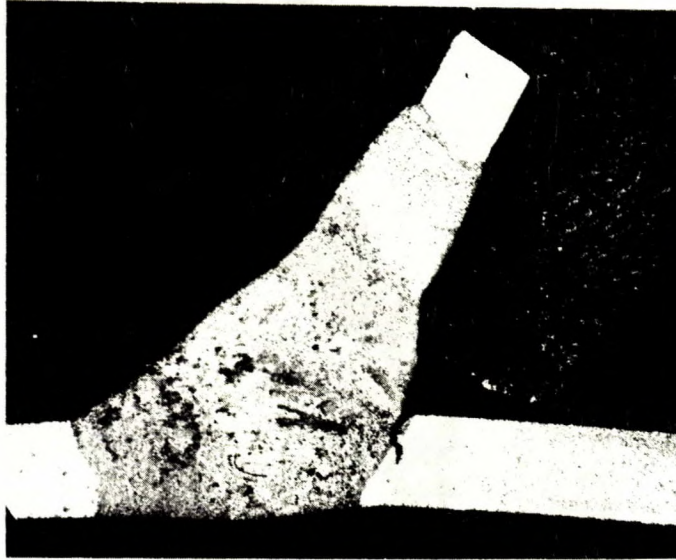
Section C2, showing fracture of connecting tube (at top of picture) and crack starting at inner junction of the weld with the Y-tube, and extending partly through the wall. Note that the weld penetrates through the Y-tube.
